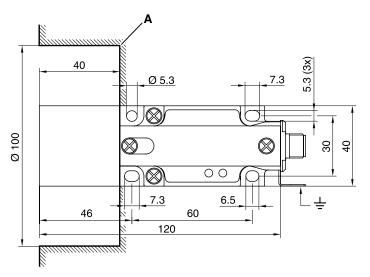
Dimensions for BIS L-409-045-001-07-S4 processor [mm]
